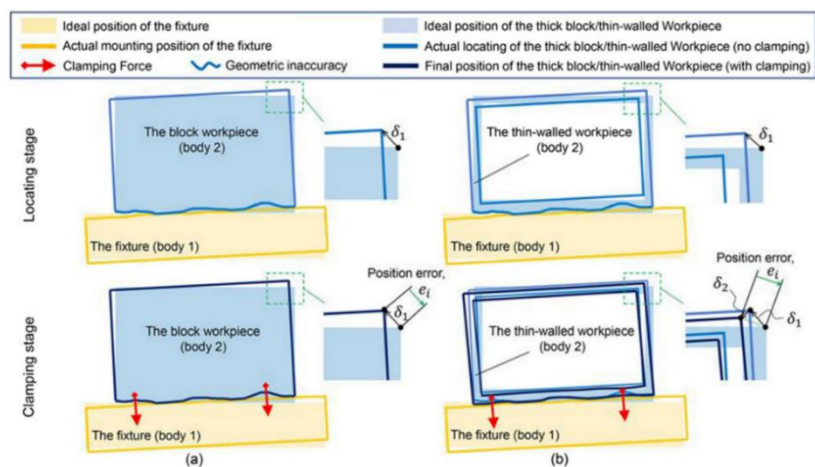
Schematics of workpiece position error in the fixture emphasizing the key difference in deformation due to the clamping force: (a) thick block and (b) thin-walled workpiece [3]
